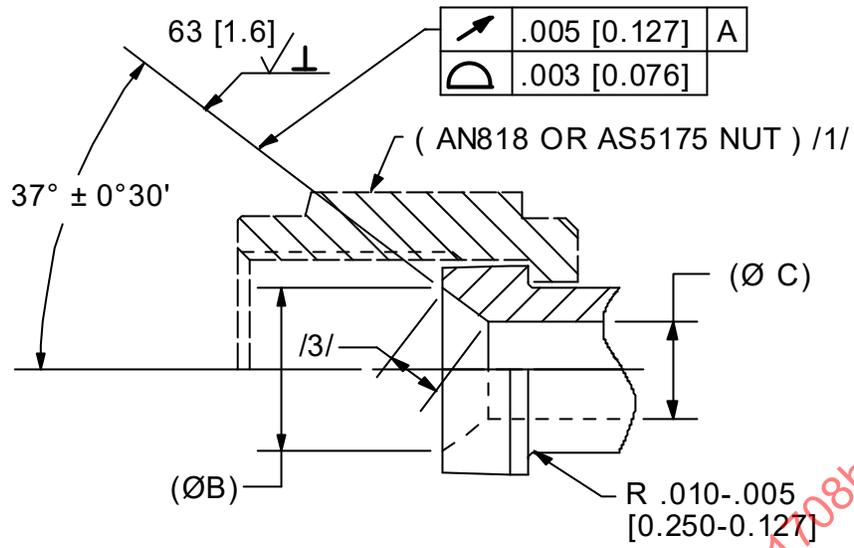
FITTING END DESIGN, STYLE D /11/
